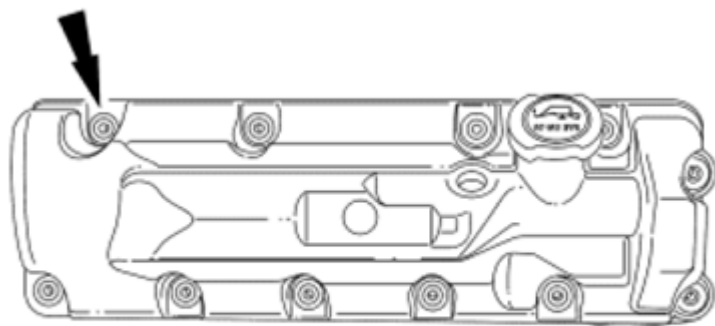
Locating RH Valve Cover Mounting Bolts And Studs
